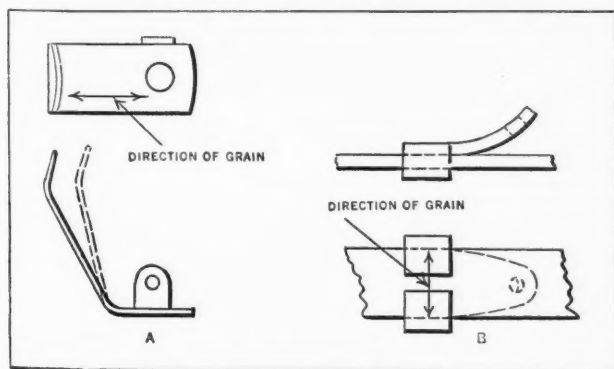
Relation between Direction of Grain of Stock and Design of Stamping is Important for Parts Similar to Examples Shown
